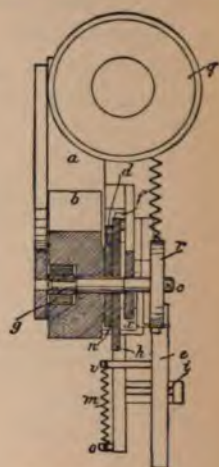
Aron Meter—Side Elevation of Winding Gear and Electro-Motor
